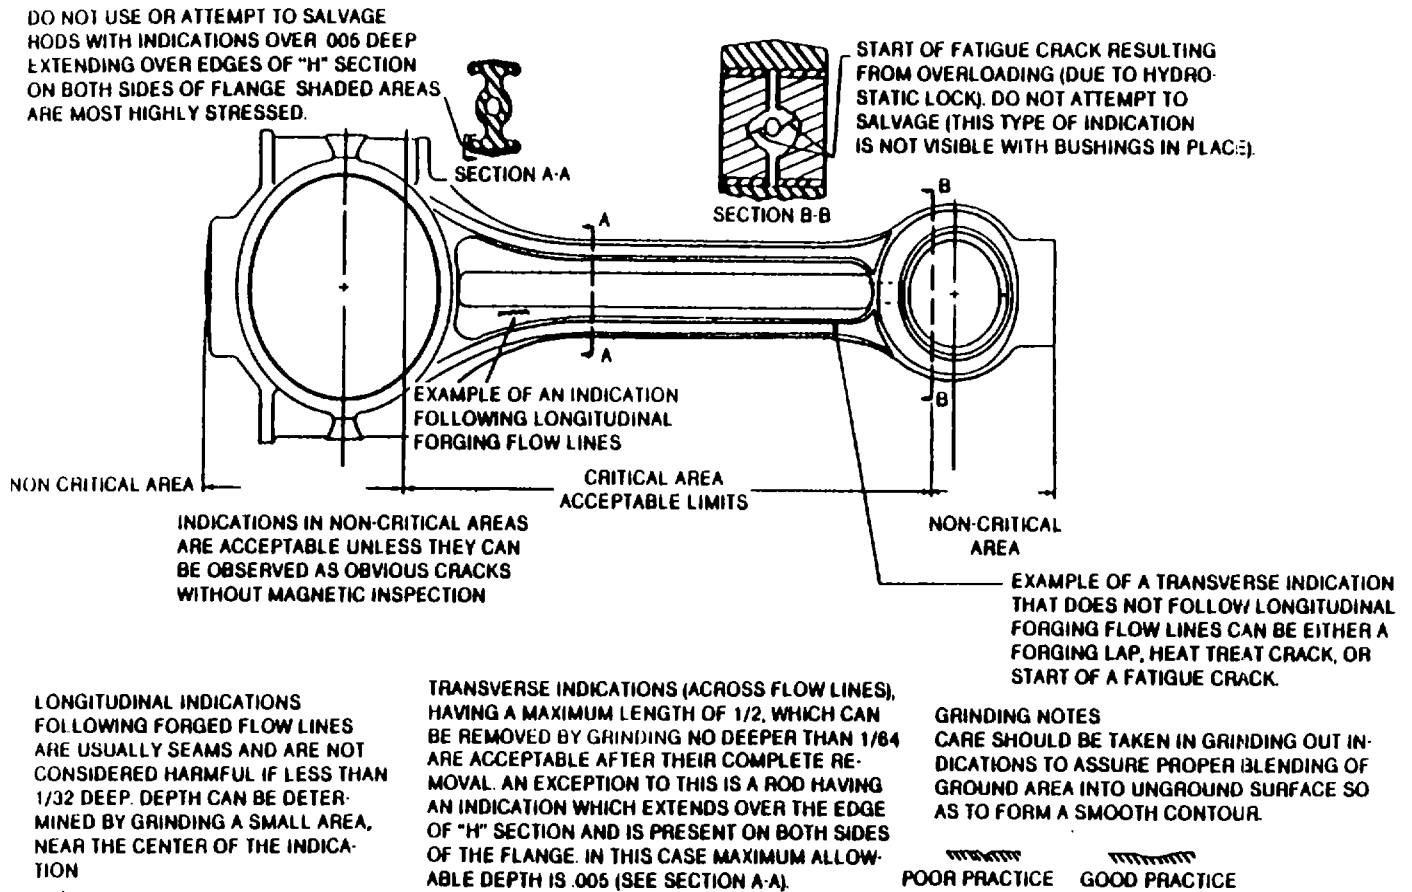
Connecting Rod Magnetic Particle Inspection Lines.
